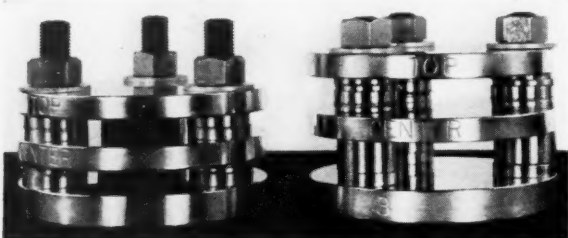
Two Assembled Jigs: Test Samples in Place in Jig on Left
